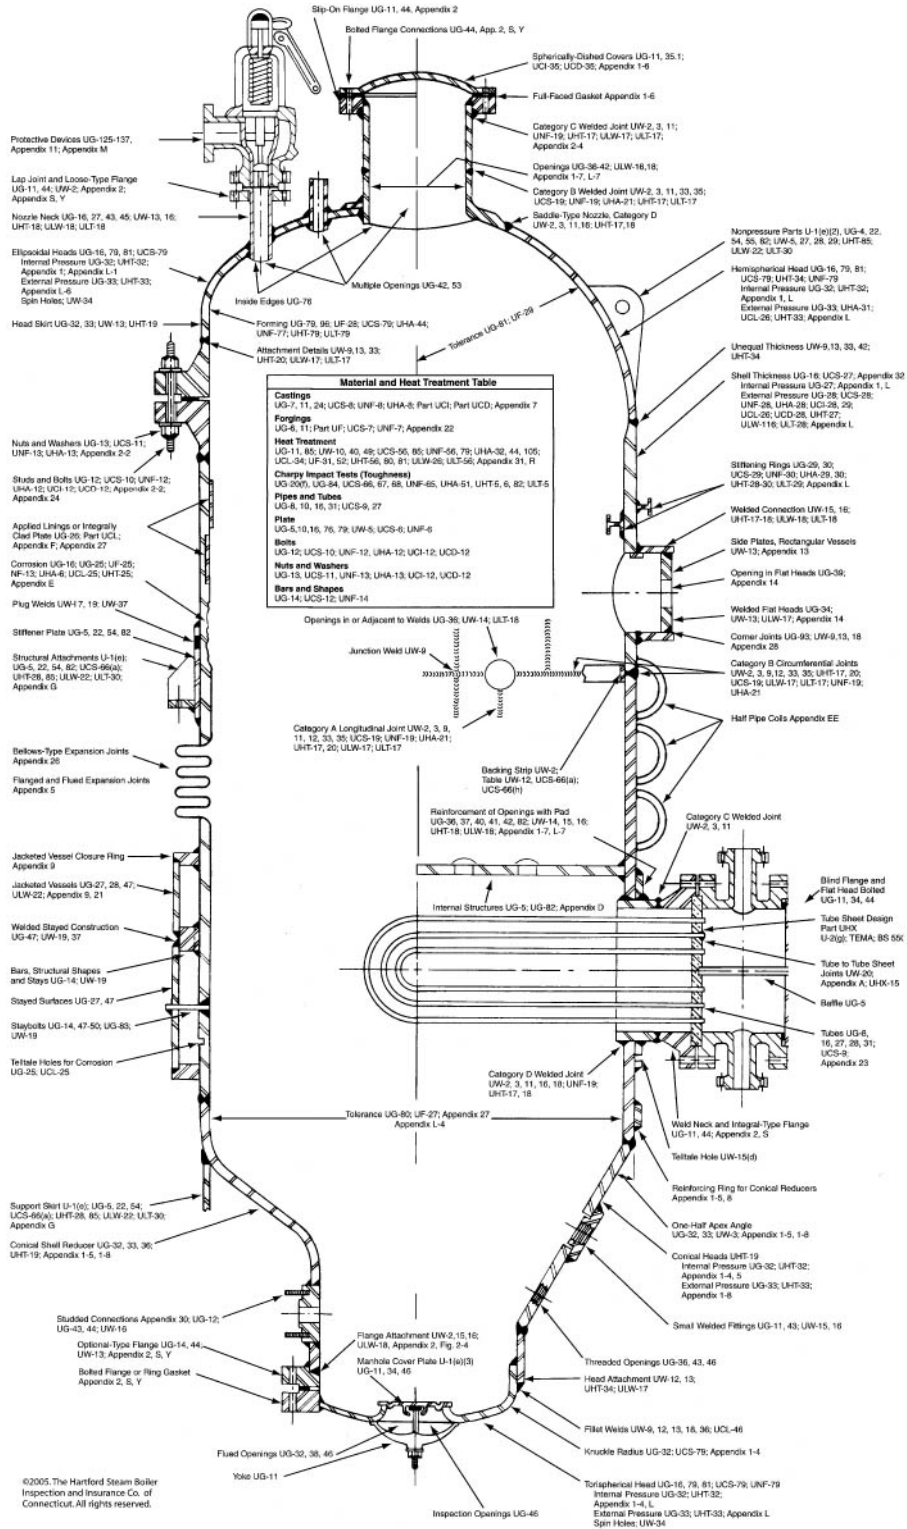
Quick reference guide to ASME Boiler and Pressure Vessel Code Section VIII, Division 1 (2004 edition). (Reprinted with permission of publisher, HSB Global Standards, Hartford, Conn.)
